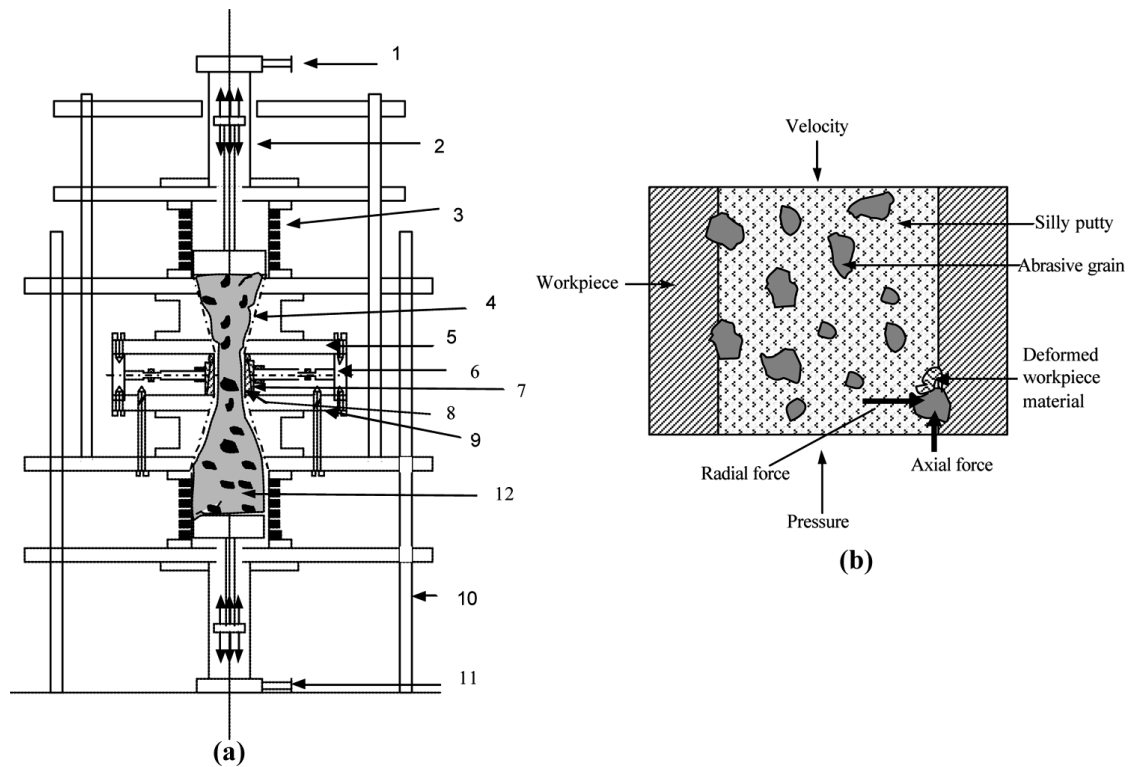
(a) Schematic diagram of experimental set-up: 1- oil inlet, 2-Hydraulic cylinder, 3-Smooth entry profile, 4- cover plate, 5-Dynamometer, 6-Split cylindrical fixture with workpiece, 7-Bottom cover plate, 8-Support frame, 9- oil outlet, 10-Medium with abrasive particles; (b) Types of forces performing on a grain. (Jain, 2008)
